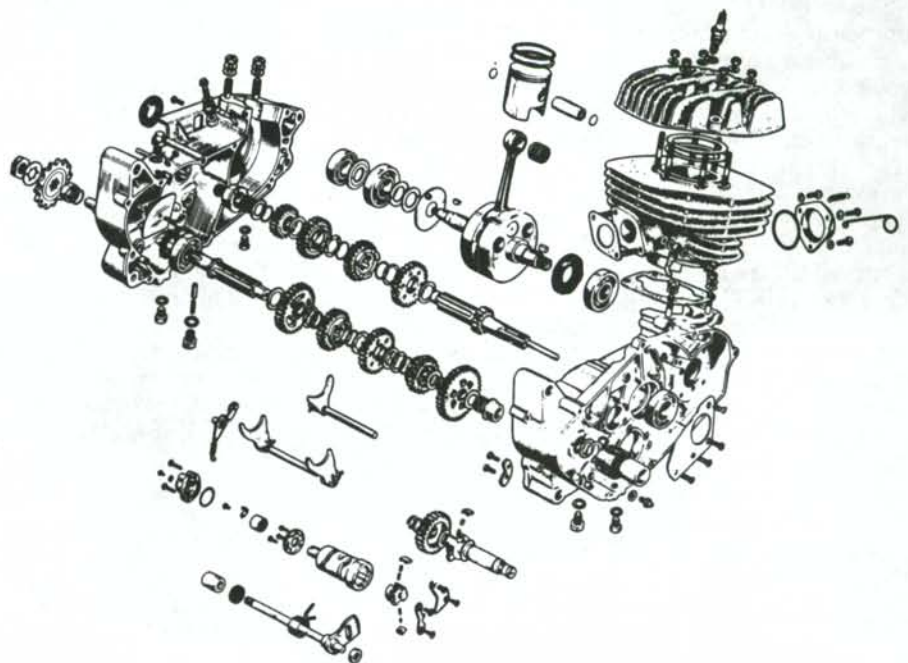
Exploded view of TS 250 engine and transmission assembly. Minor differences may be seen between this unit and later models.
